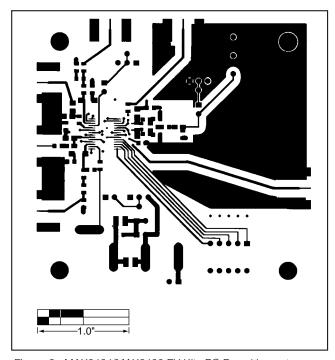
MAX2424/MAX2426 EV Kits PC Board Layout—Component Side
